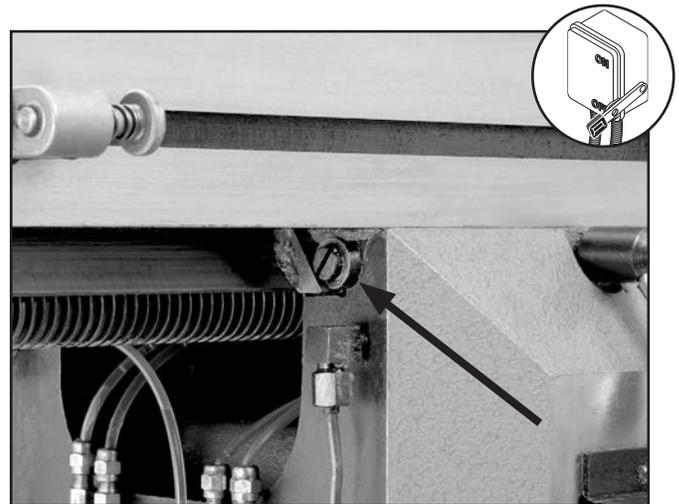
X-axis gib adjusting screw (underneath the left side of the table).
